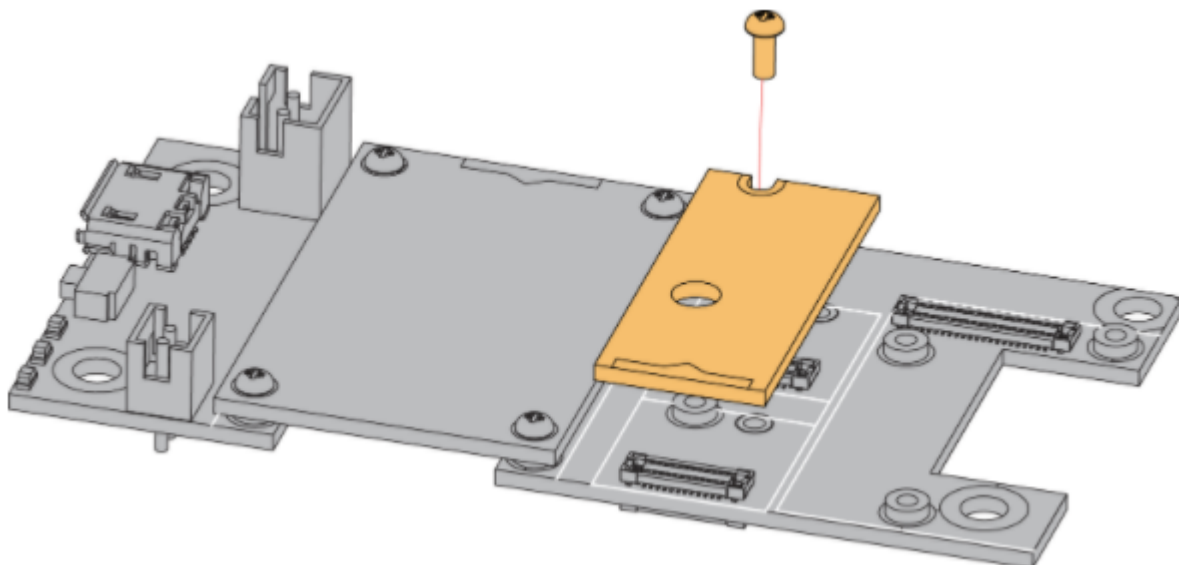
RAK12059 WisBlock Liquid Level Sensor Mounting
